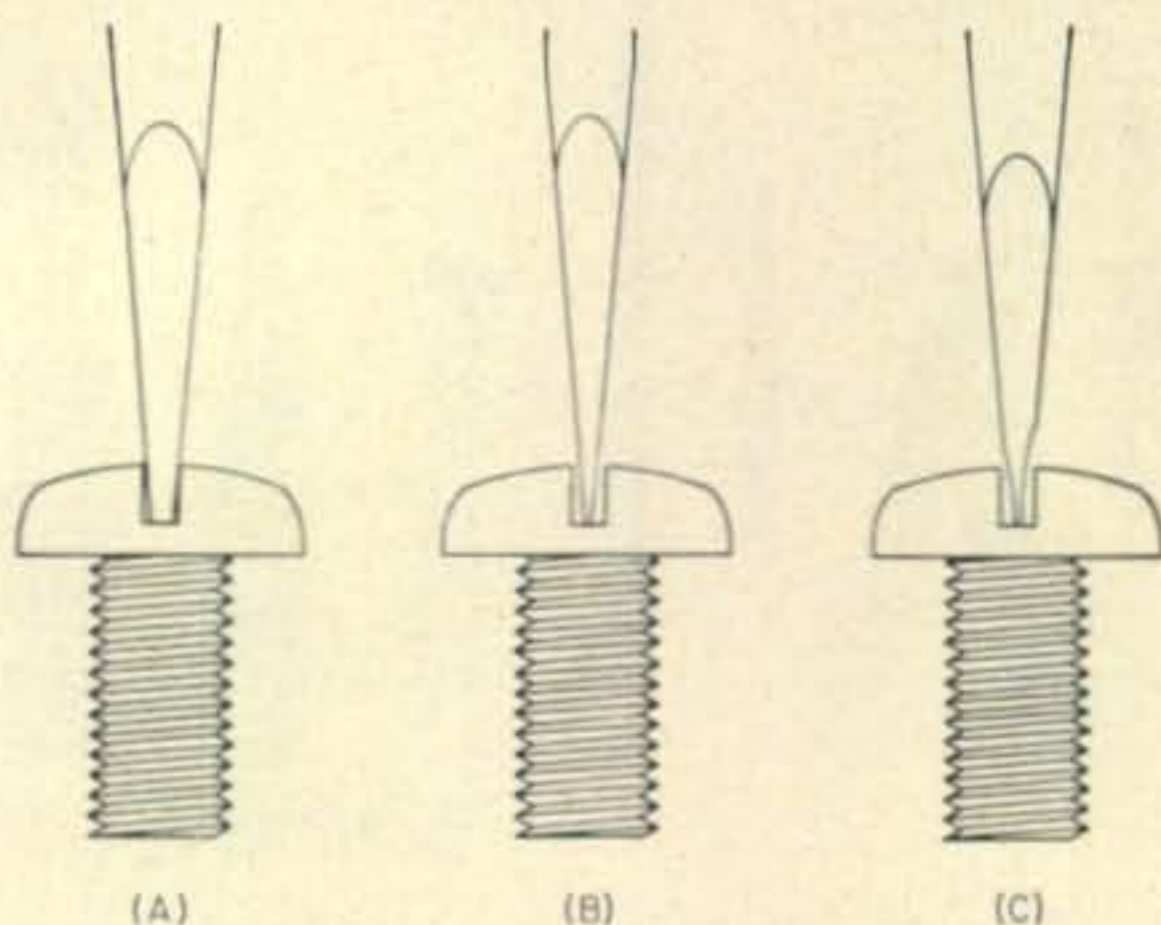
Properly seated screwdriver is shown at (A). Too small a blade, shown at (B), and a worn out chisel-shaped or pointed blade, shown at (C), will grip poorly and slip easily.
